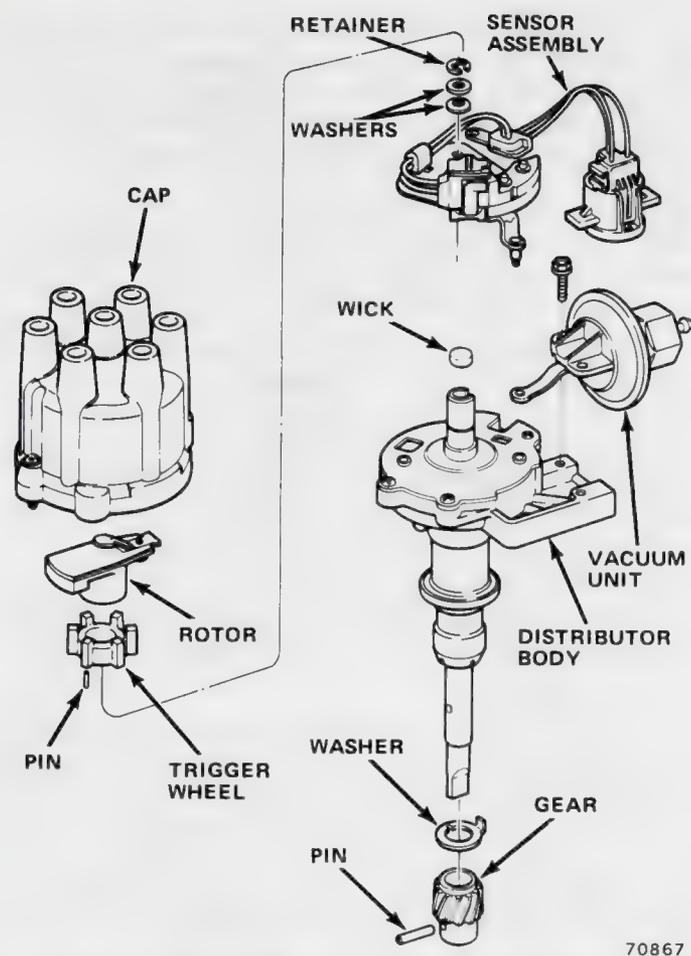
G-14 SSI Distributor Components—Six-Cylinder Shown
